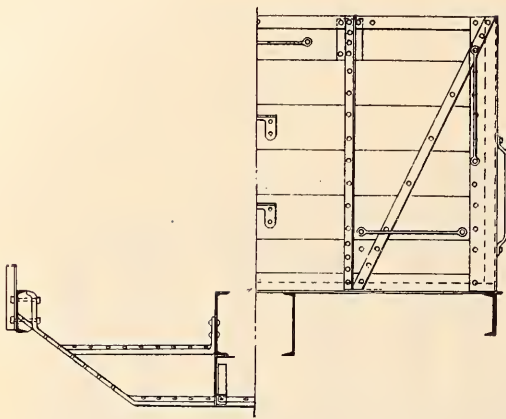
PARTIAL END ELEVATION AND HOPPER BRACING OF HOPPER CAR WITH STEEL UNDERFRAMING.
